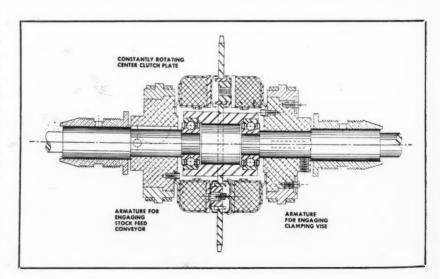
Magnetic clutch of simplified design which controls automatic feed conveyor of machine shown in Fig. 1
